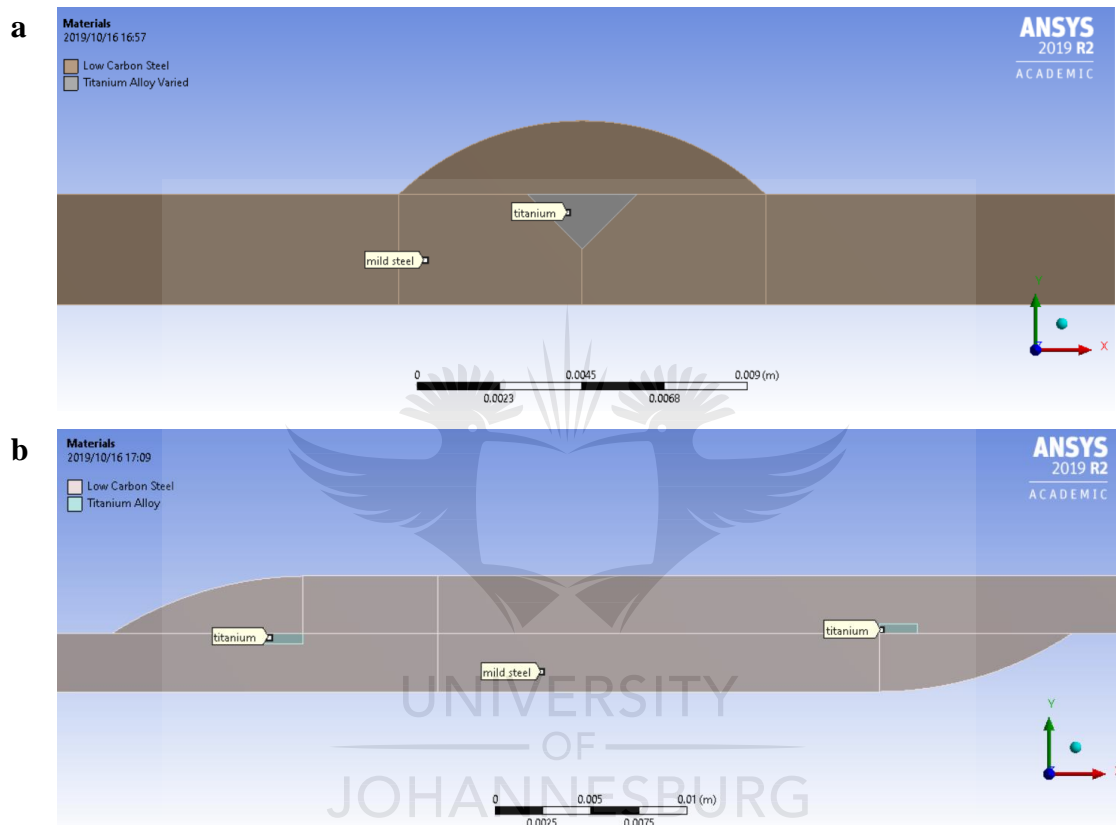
Weld geometry of reinforced (a) butt weld joint and (b) lap joint
